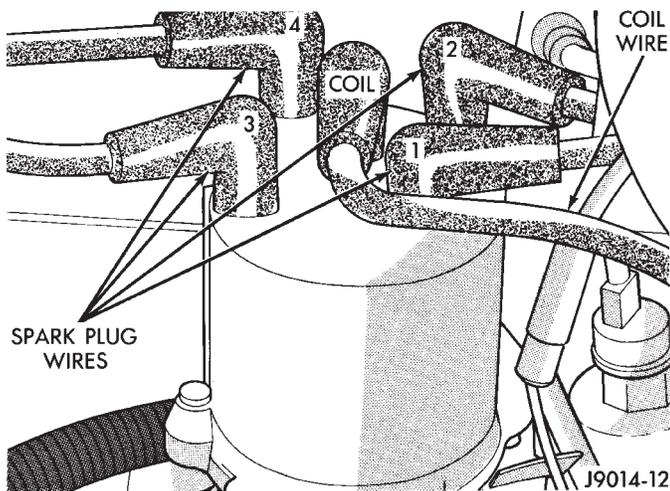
Spark Plug Cable Positions—2.5L Engine
